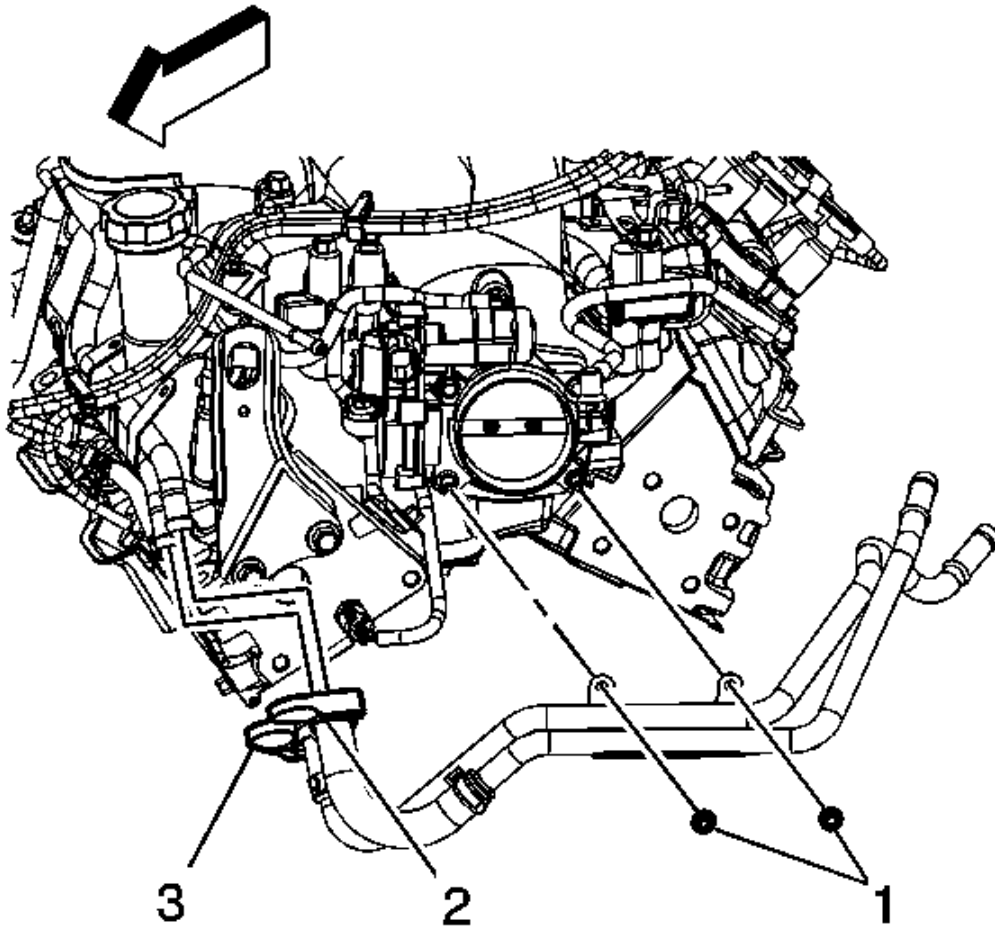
Heater Inlet & Outlet Pipe & Nuts
